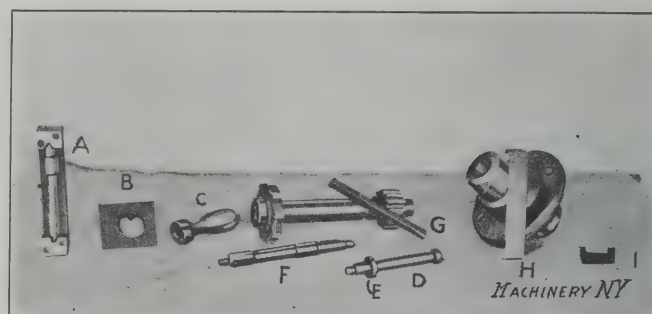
Gages for Testing the Parts of the Device shown in Fig. 5
